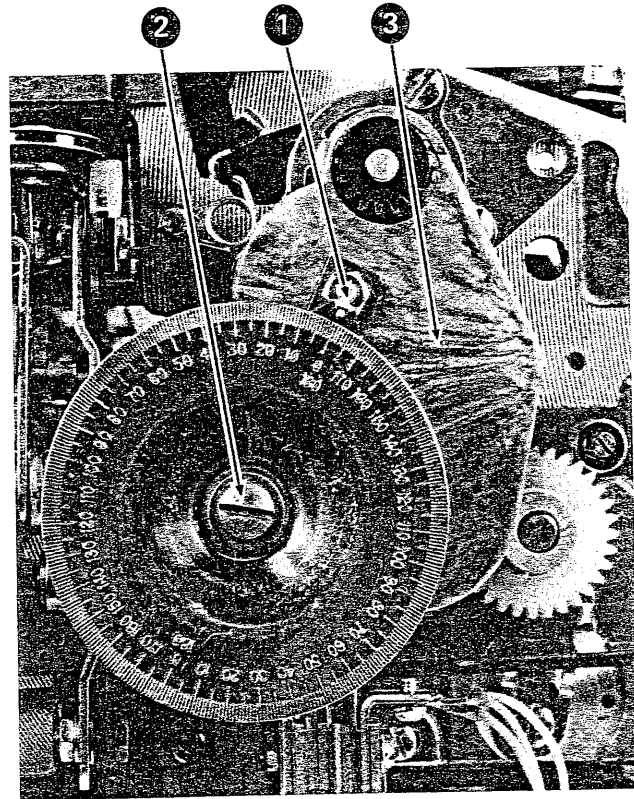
Cycle-Clutch and Cycle-Shaft Removal (Steps 1-6)
